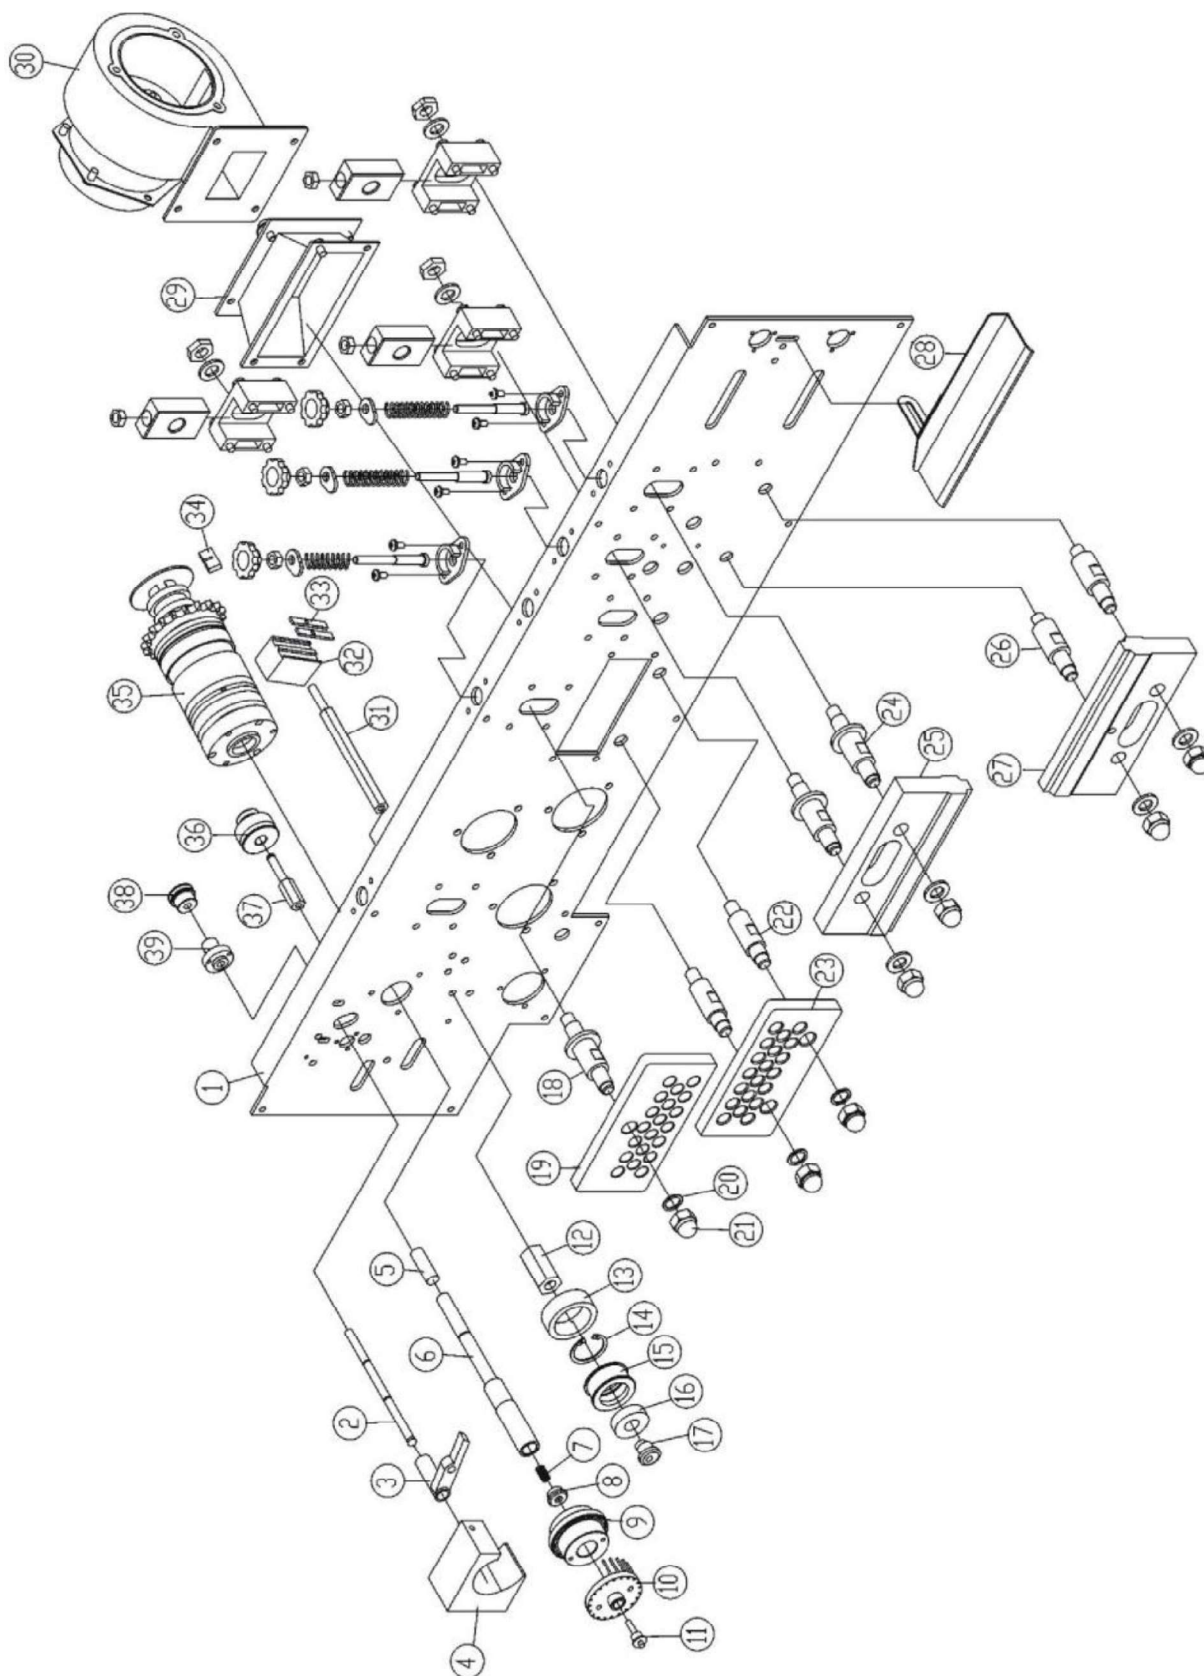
Heating / Cooling Blocks and Dry Ink Coding
